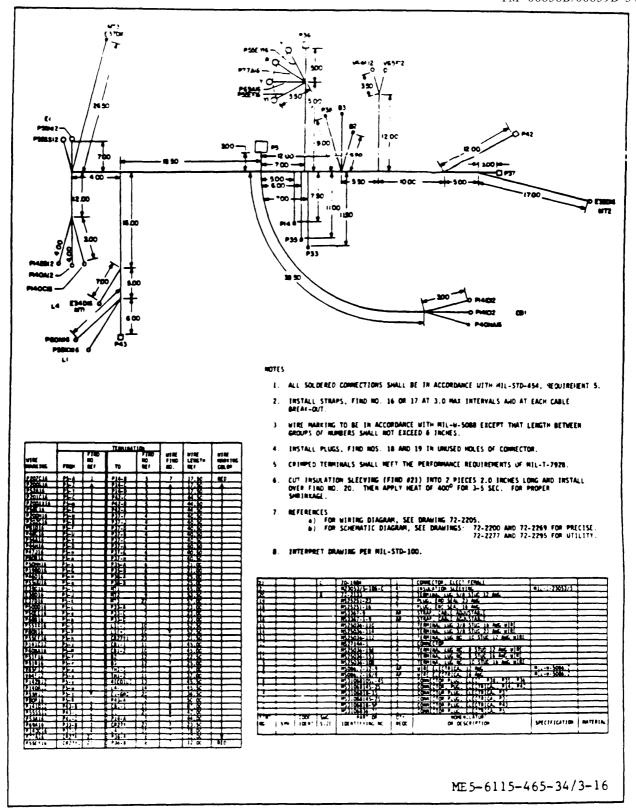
Engine Wiring Harness Assembly, Drawing No. 72-2284
